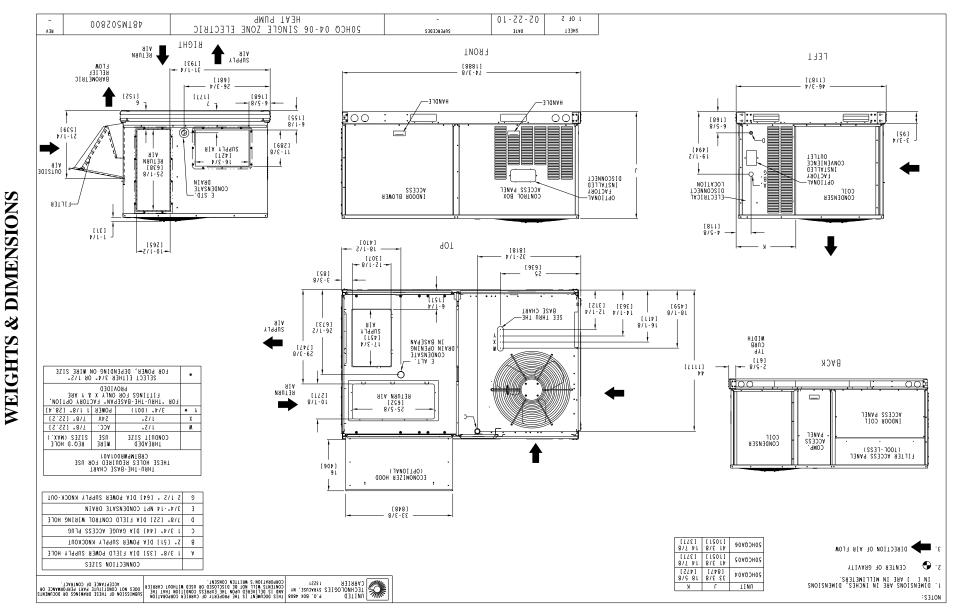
Dimensions 50HCQ 04–06 (Sheet 1 of 2) 28
